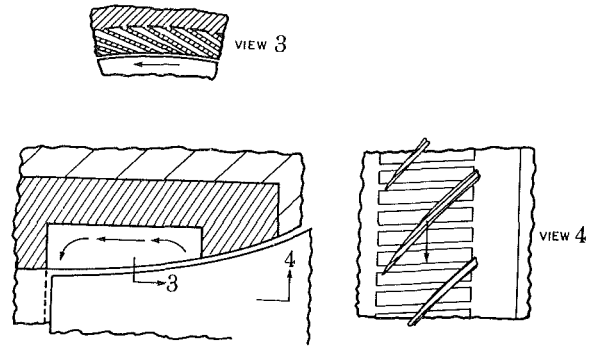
Centrifugal compressor impeller casing treatment geometry [84]
